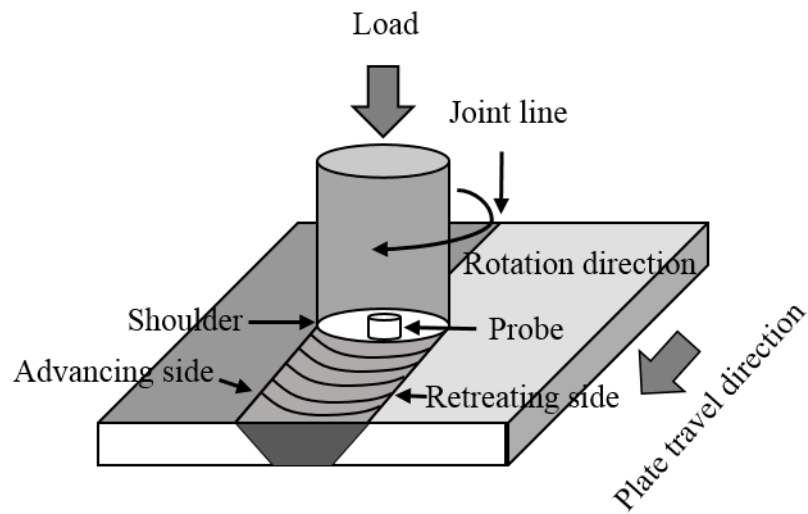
Schematic illustration of Friction Stir Welding.
